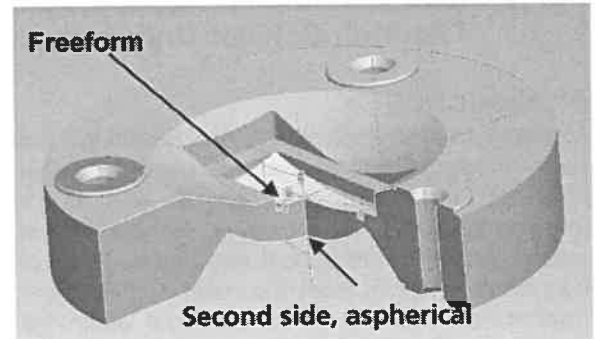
Freeform element, inserted into a rotationally symmetrical fixture which is used for: positioning, referencing and for a stress free mounting. The freeform element will be separated after diamond machining.
